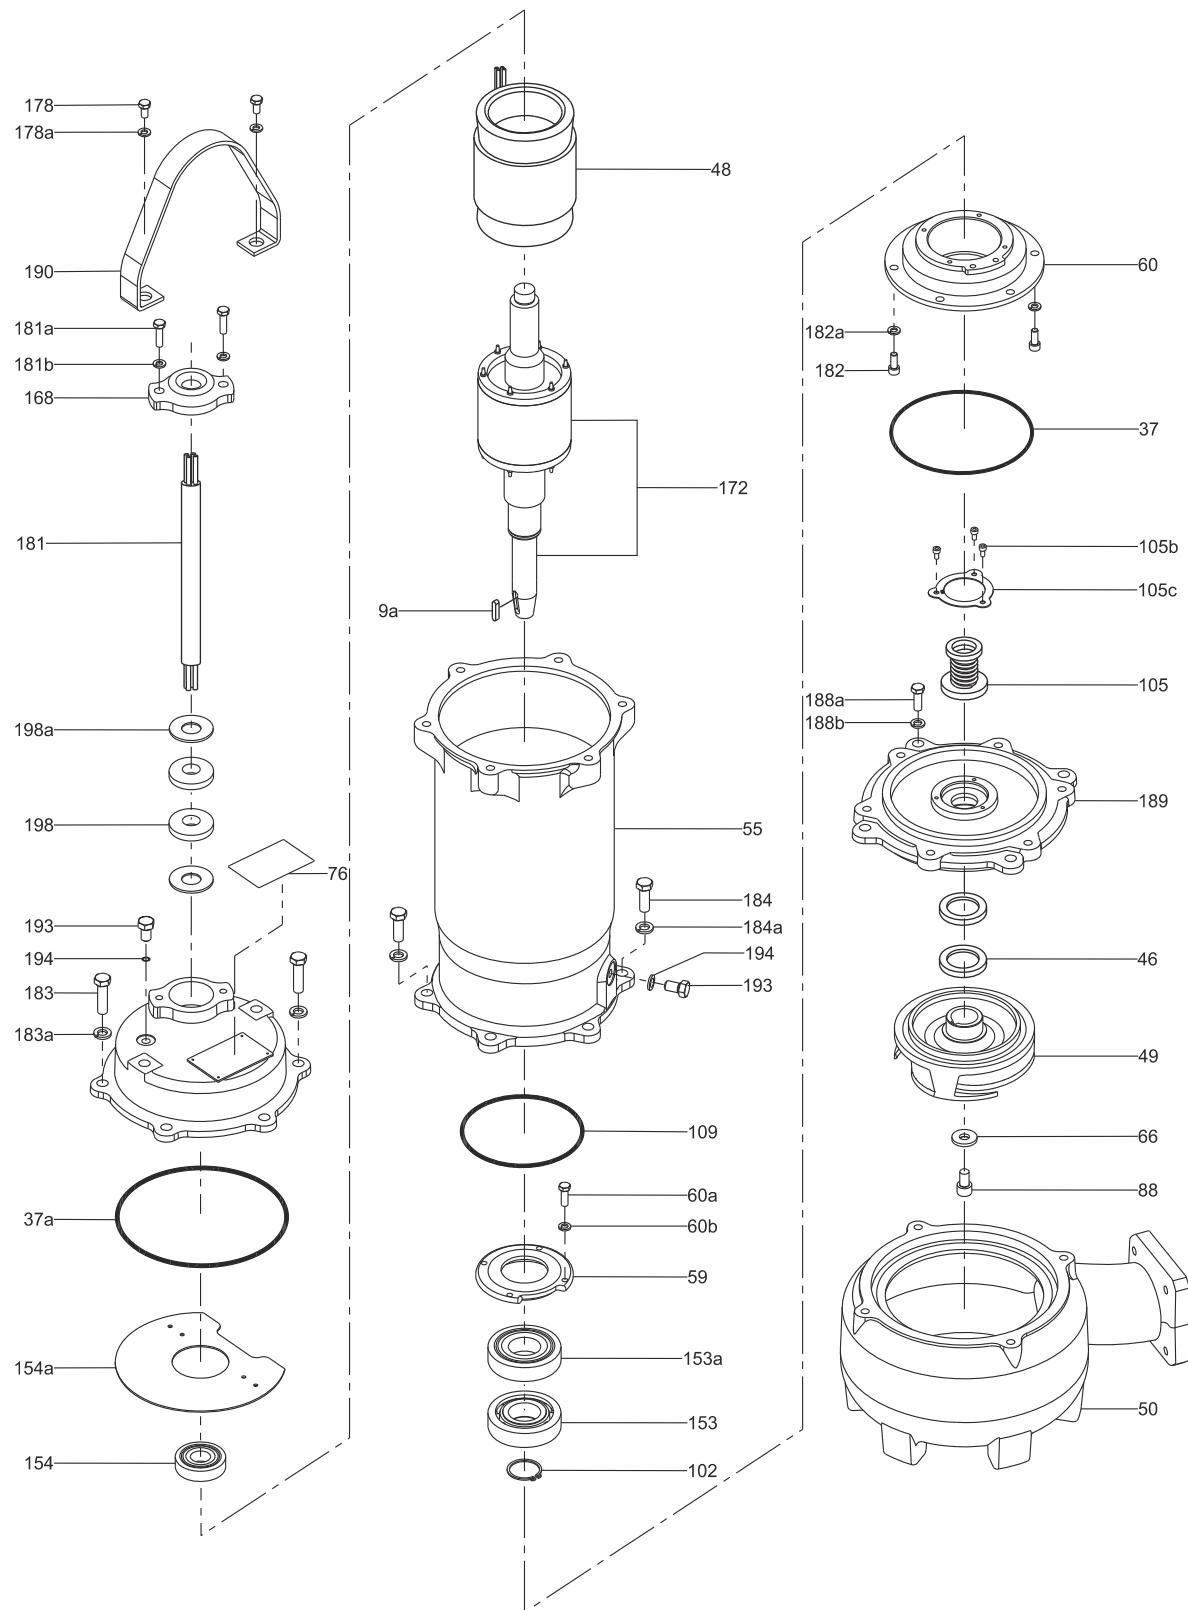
Exploded view DPK.V.80.80.55.2 and DPK.V.80.80.75.2
